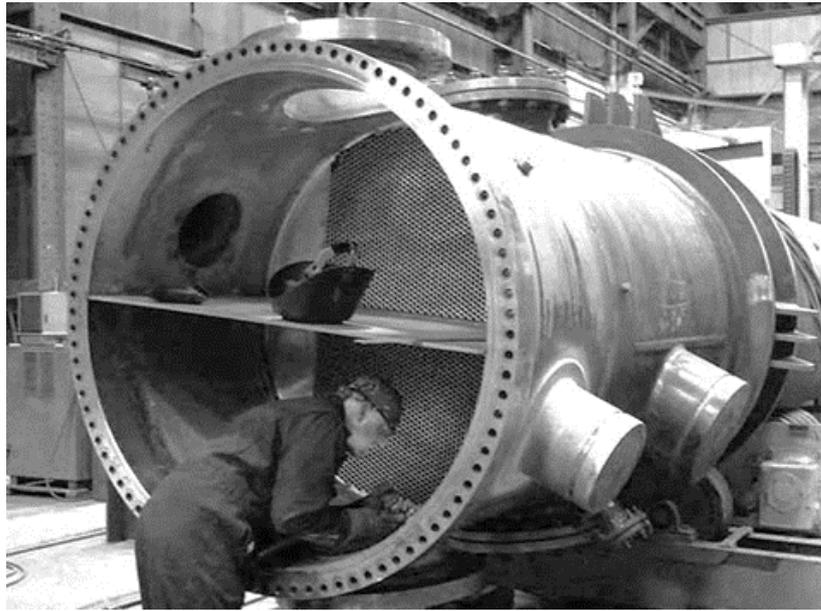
End channel of a shell and tube heat exchanger (Joseph Oat Corporation, 2012).
